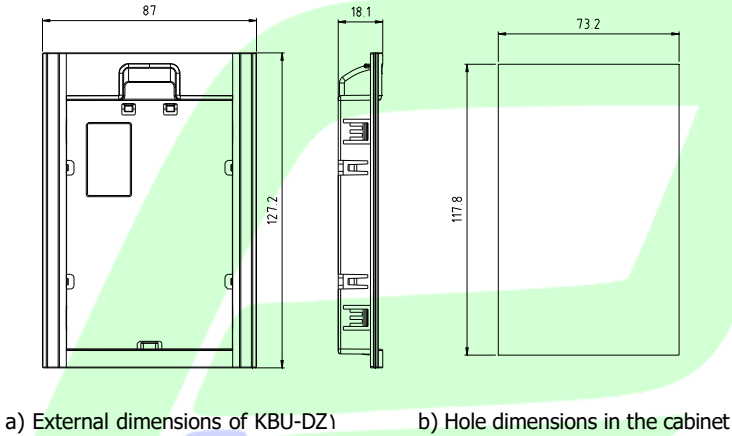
External dimensions of KBU-DZ1 and cabinet hole dimensions
